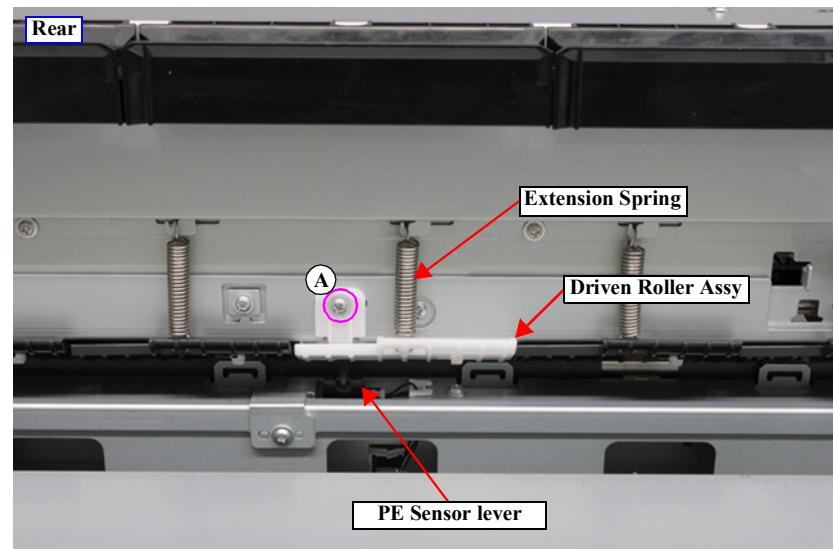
Removing the Driven Roller Assy and the PE Sensor lever
